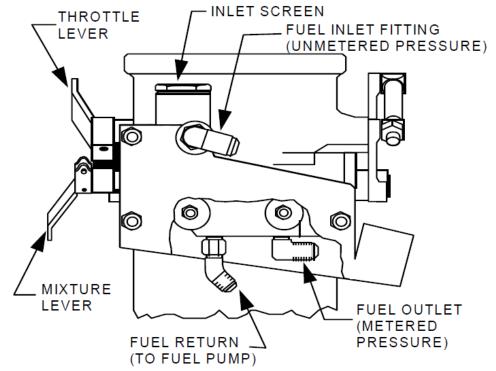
Throttle and Control Assembly Front View (except GTSIO520-D, F, H, K, L, M & N
